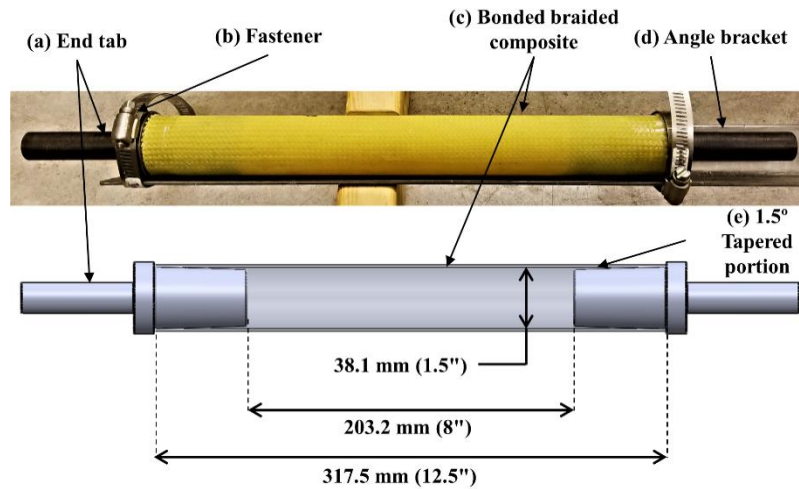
Picture and geometrical configuration of TBC test specimen. The figure shows a) end tabs, b) fasteners, c) bonded braided composite, d) angle bracket and e) the 1.5° tapered portion of the end tab.
